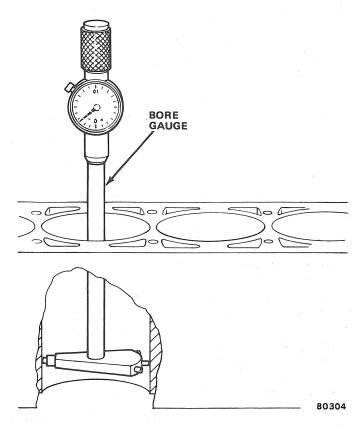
B-152 Measuring Cylinder Bore with Bore Gauge
